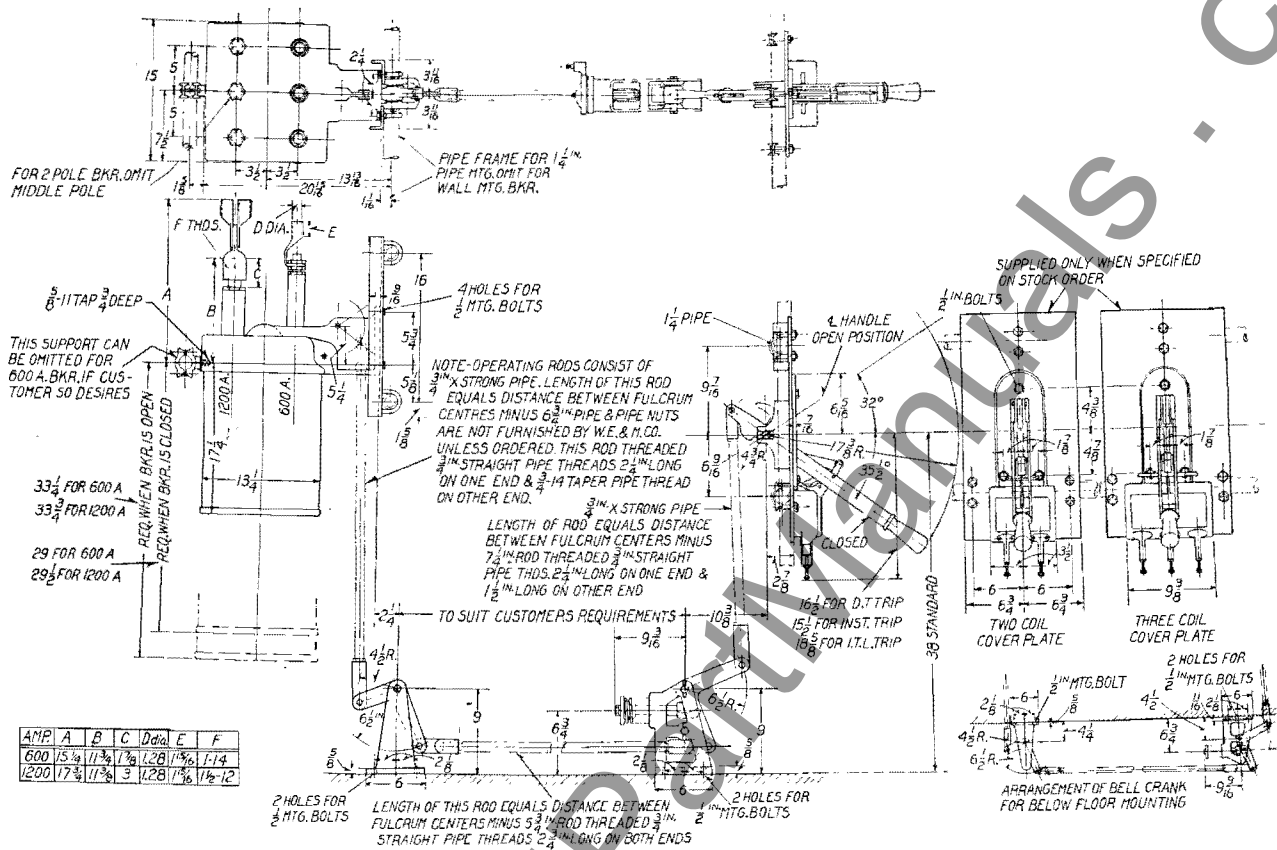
OUTLINE, SHOWING REMOTE MOUNTING DETAILS FOR TYPE F-124 OIL CIRCUIT-BREAKER
